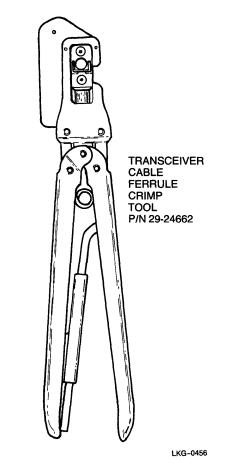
Standard Ethernet Cable Crimp Tool and Die Set
